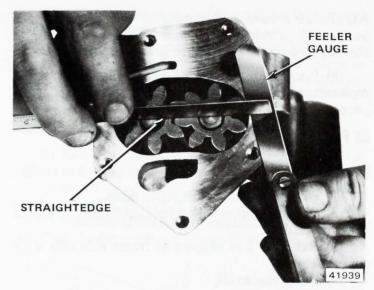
B-151 Gear End Clearance Measurement—Feeler Gauge Method
